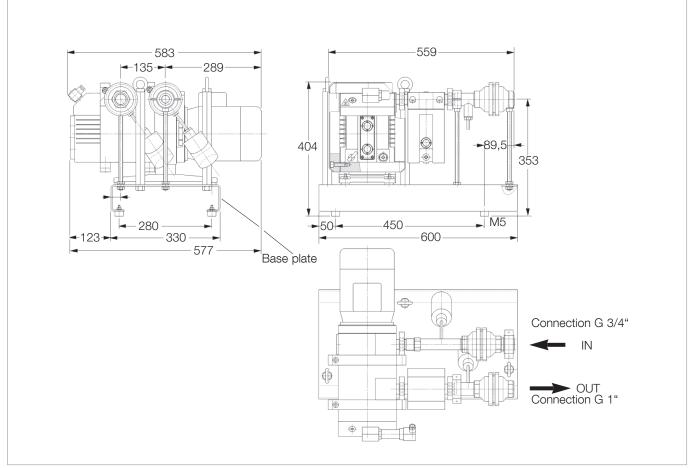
Dimensional drawing of the TRIVAC-D 16 B Ex
